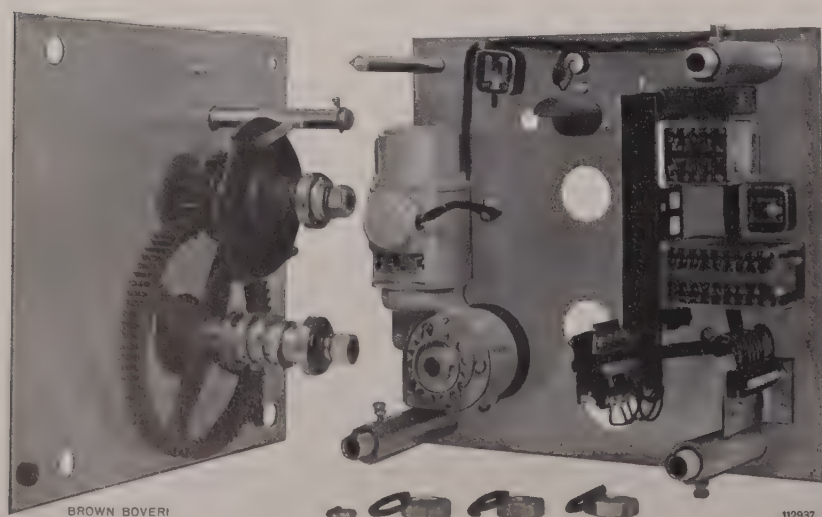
Motor-driven operating mechanism, removed from the breaker and opened
